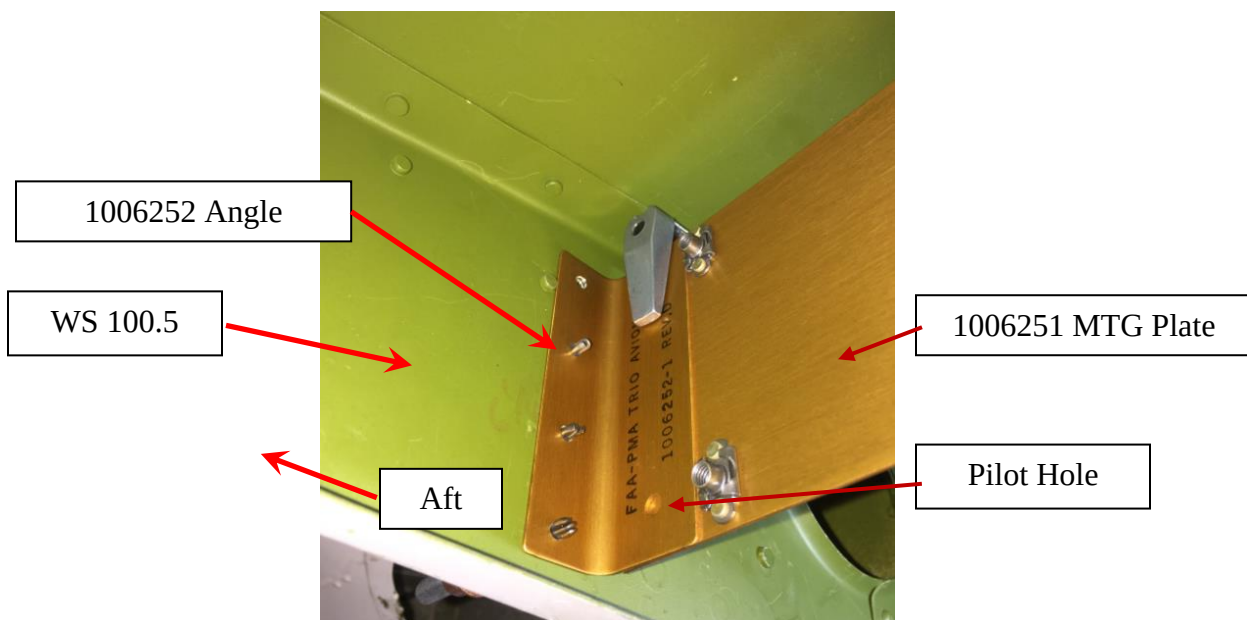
1006252 ANGLE AND 1006251 MOUNTING PLATE INSTALLATION
